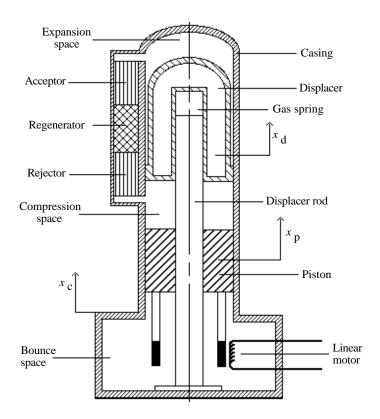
General arrangement of a free-piston Stirling cooler driven by a linear motor
